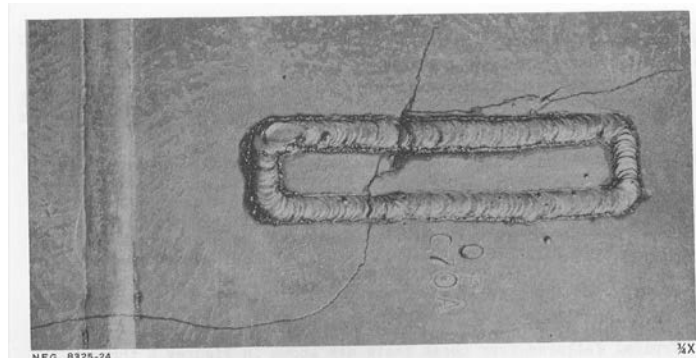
Stress corrosion cracking in area near weld attachment [14].
